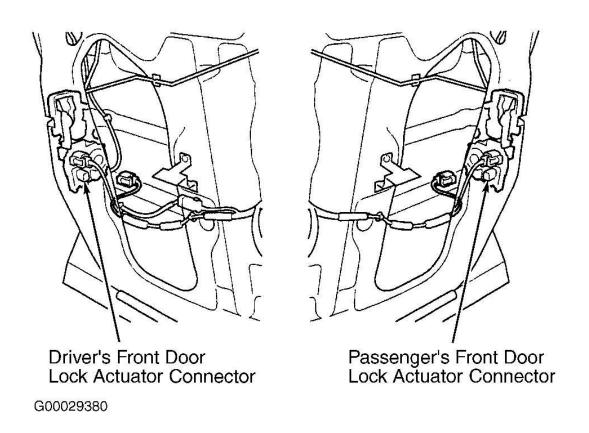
Identifying Front Door Lock Actuator Terminals Courtesy of AMERICAN HONDA MOTOR CO., INC.
